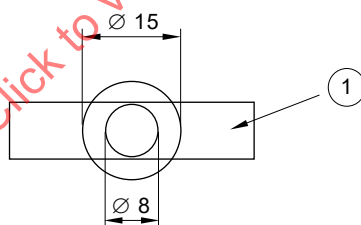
Example of mounting of a panel board type circuit-breaker for mechanical impact test (9.13.2)
